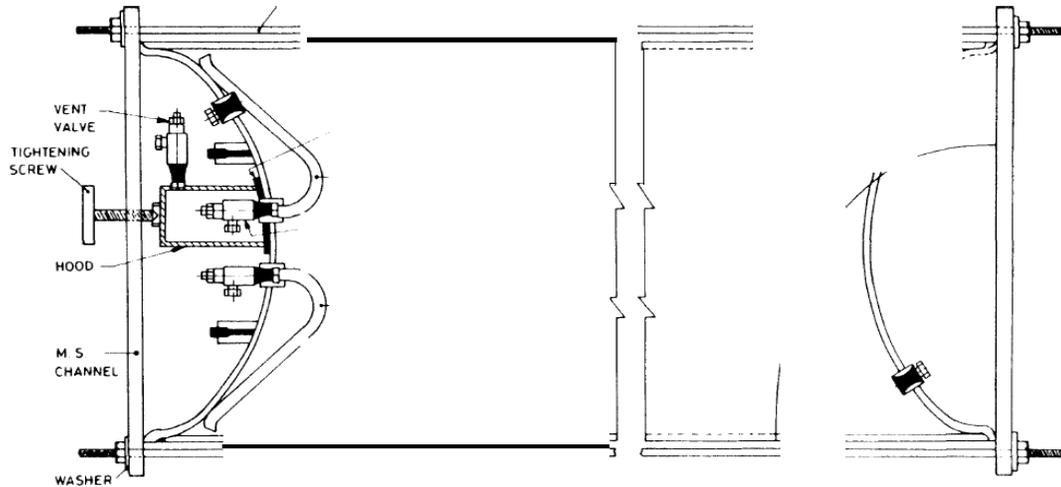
CYLINDER VALVE HOOD ASSEMBLY
